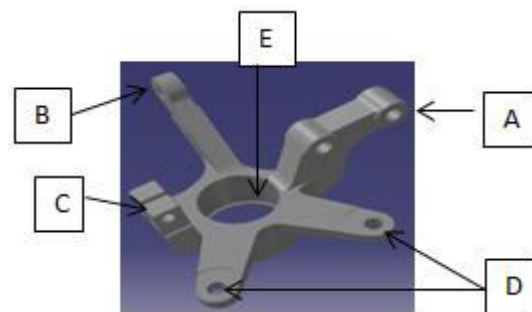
Components of Steering Knuckle by Free CAD 0.2 software.
